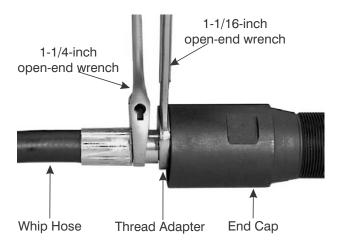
Loosen Hex Fitting and Remove Whip Hose
